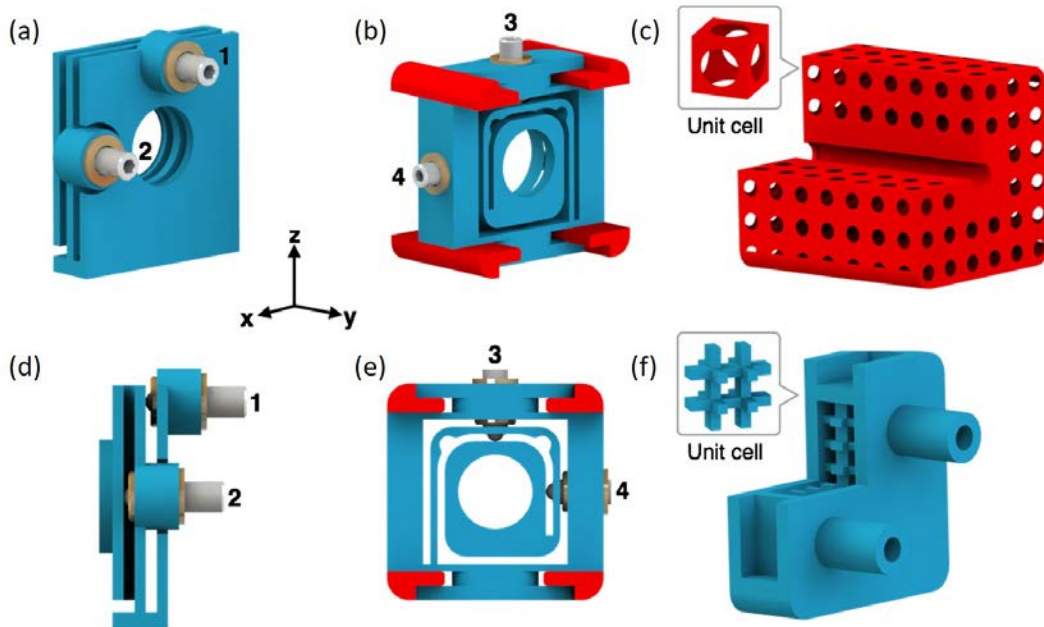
Laser mechanical and cooling design. a,d, Schematic of the 2-axis adjustable mirror mount based on flexure structure b,e Schematic of the 3-axis adjustable lens mount. c. Schematic of crystal cooling mount based
